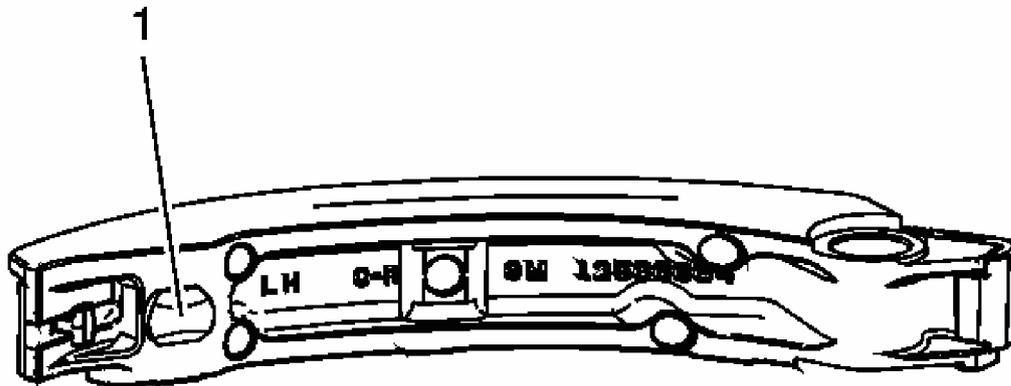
Inspecting Left Secondary Timing Chain Tensioner Contact Pad
